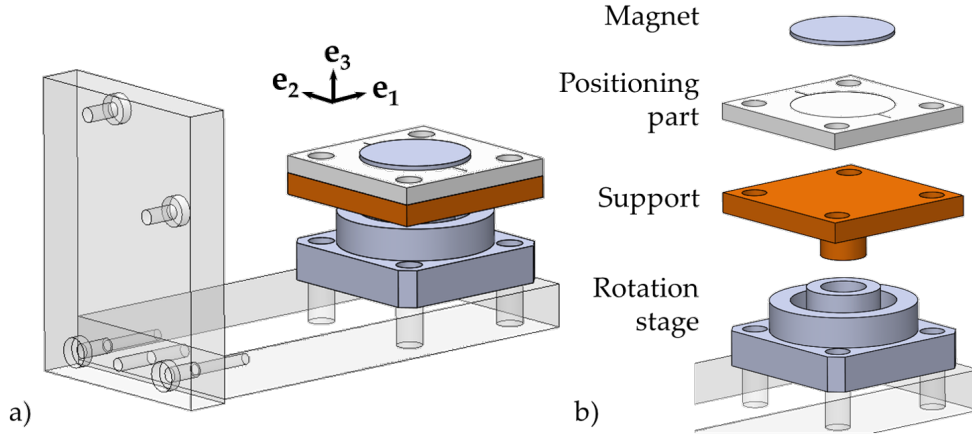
Mechanical support of the magnet in the experimental setup: Full view of the assembly connected to the linear stages (a) and zoom on the exploded view of several components (b).
